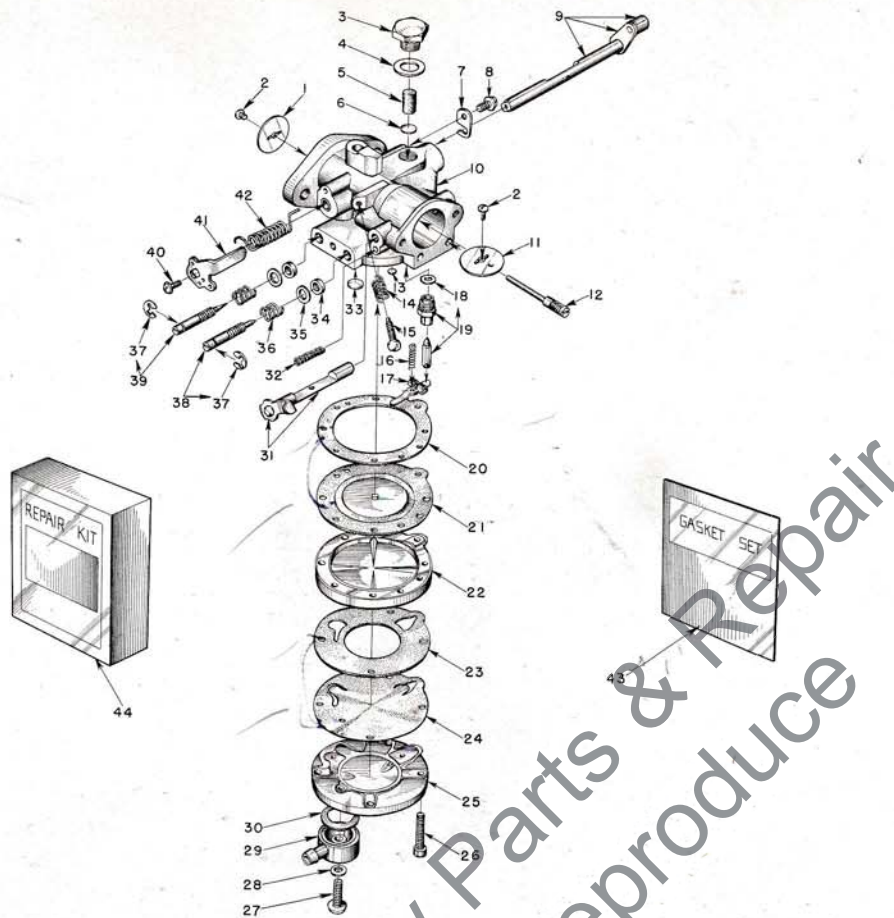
BROWN 1-CP CARBURETOR PARTS
